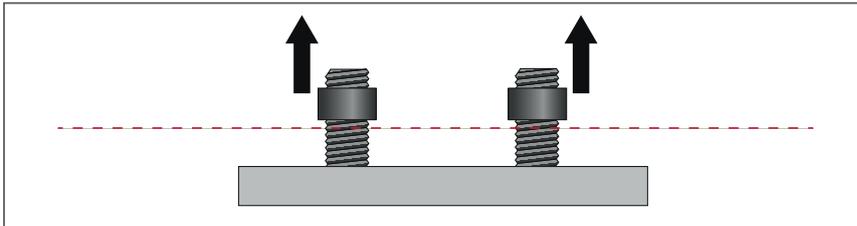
HV BM 1.2, remove the spacers from the threaded bolts
